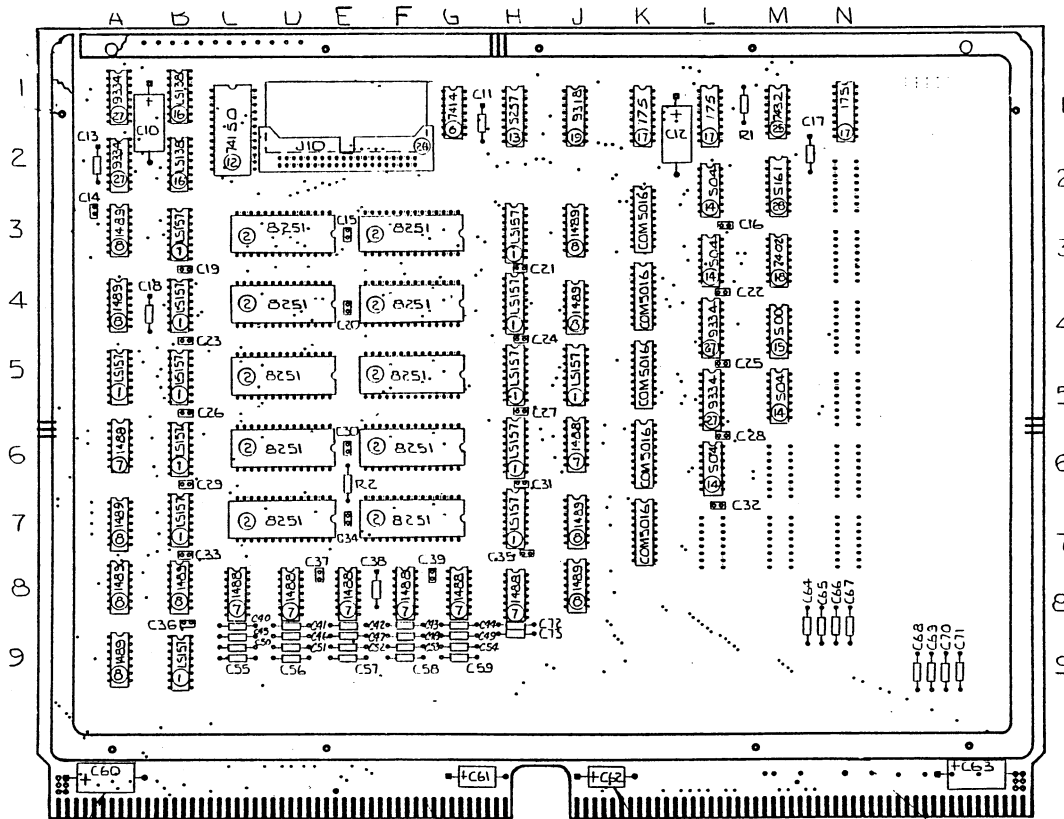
Expansion BCLA Printed Wiring Assembly
